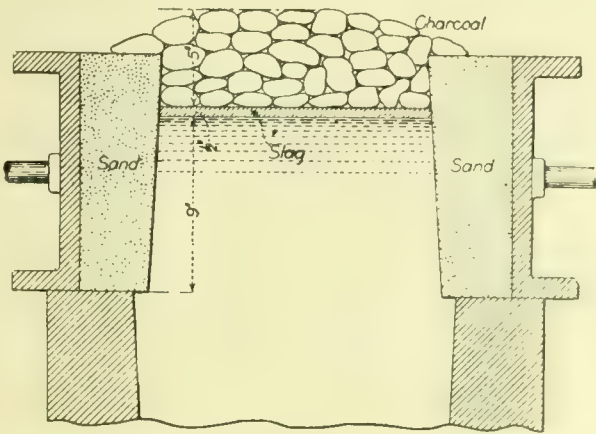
ENLARGED VIEW OF UPPER PART OF FIG. 1. The mould is for a 15in. ingot.
